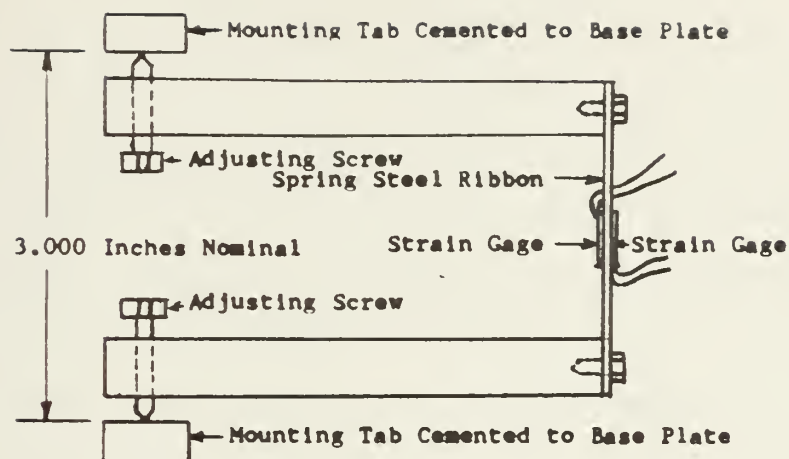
Extensometer. The Adjusting Screws are Set So That the Spring Holds Extensometer Firmly in Place.
